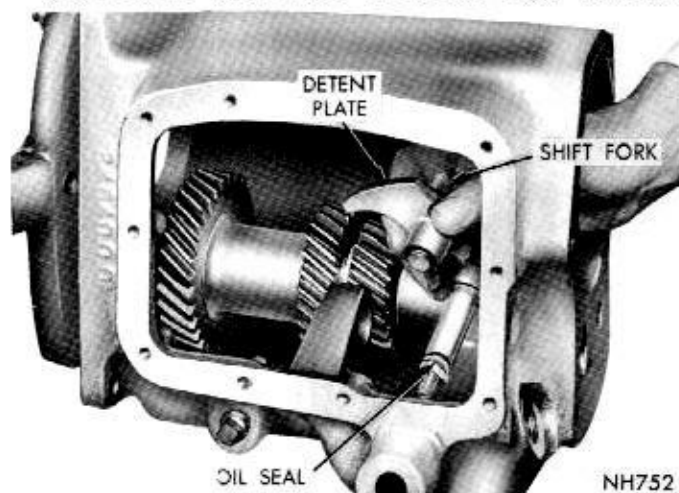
Removing or Installing Reverse Shift Fork and Lever
